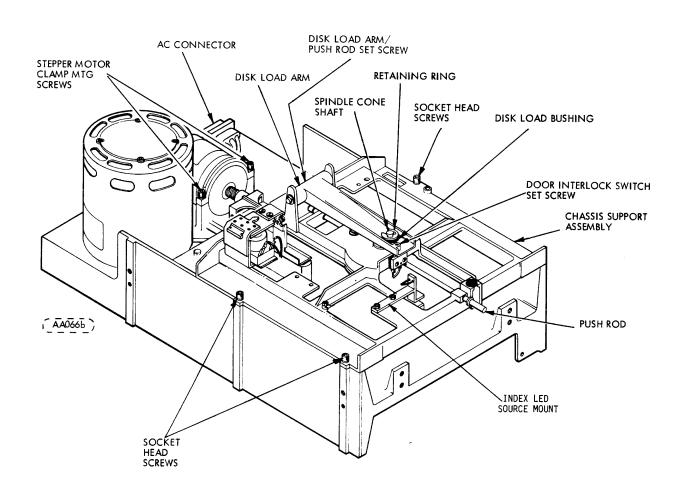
CHASSIS BASE ASSEMBLY
